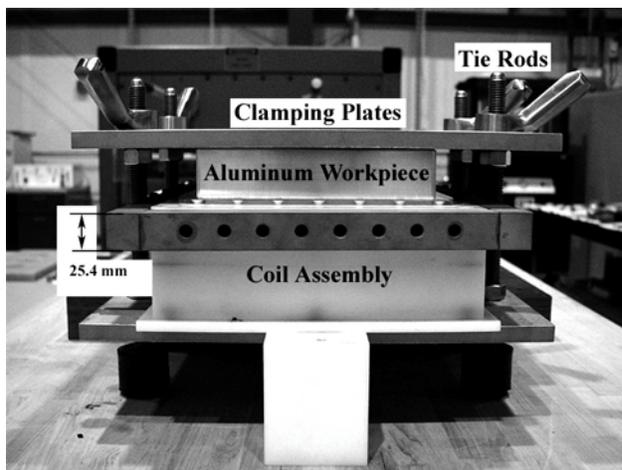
Photograph of the Ford and PNNL designed coil assembly. This assembly has undergone cyclic testing at PNNL and achieved greater than 5000 cycles with no signs of coil degradation.
